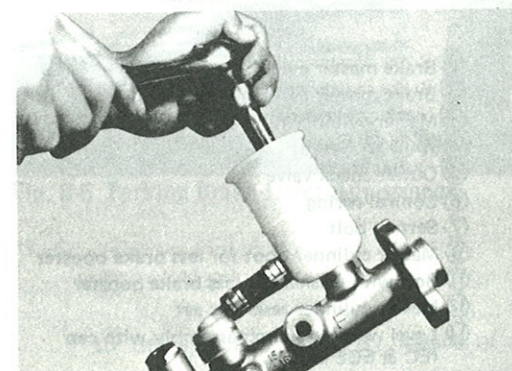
Removing Master Cylinder Reservoir Setting Bolt
